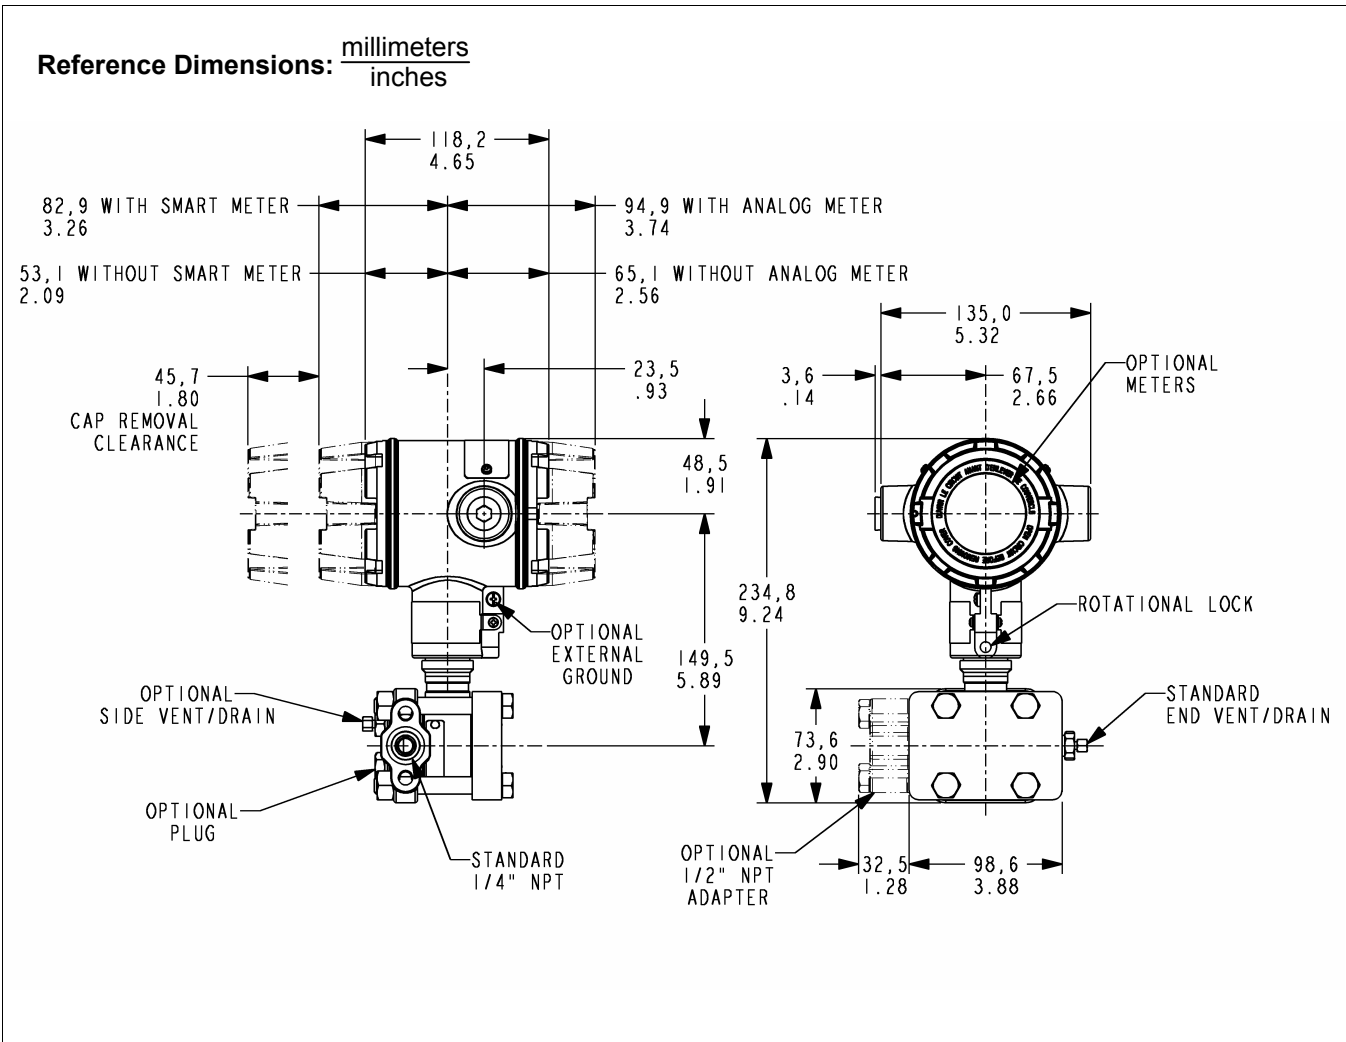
Typical mounting dimensions for dual-head models STG944 and STG974 for reference
